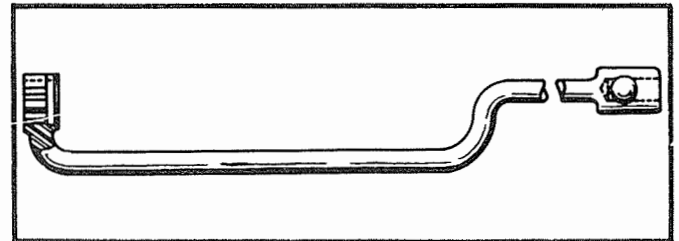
Fuel Injection Tube to Supercharger Rear Housing Connection Nut Wrench
